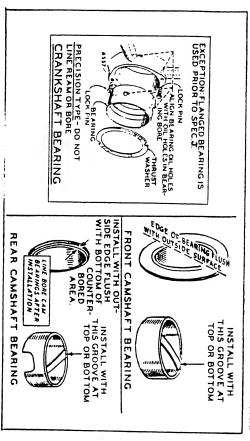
MAIN AND CAMSHAFT BEARINGS
